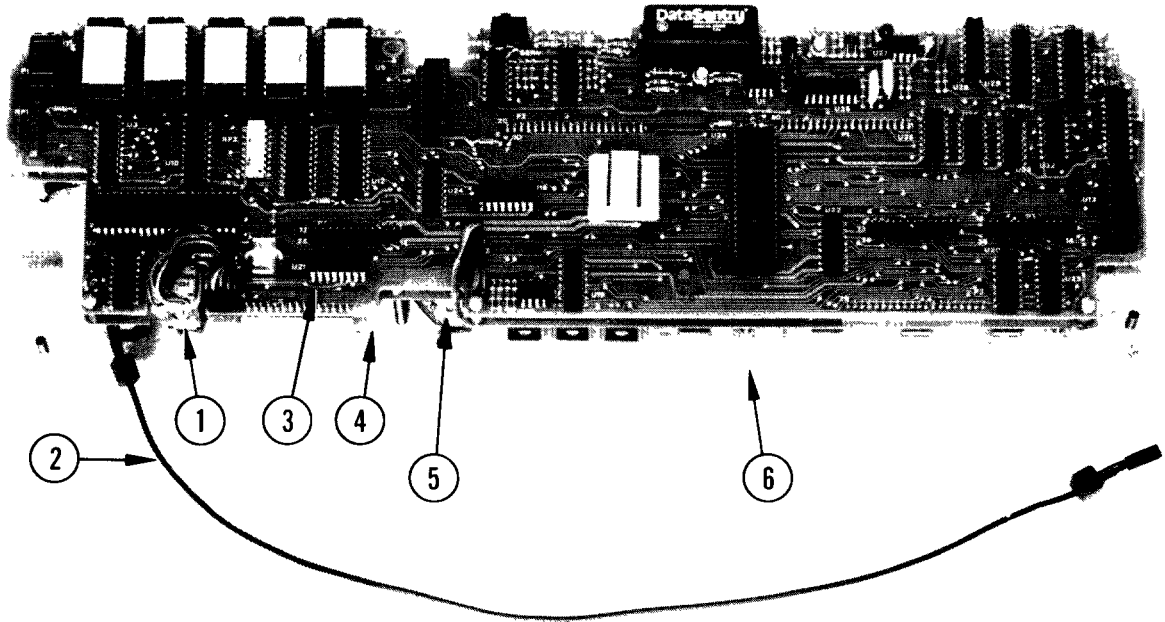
A15 Front Panel Assembly, Dwg. 660-D-8015
